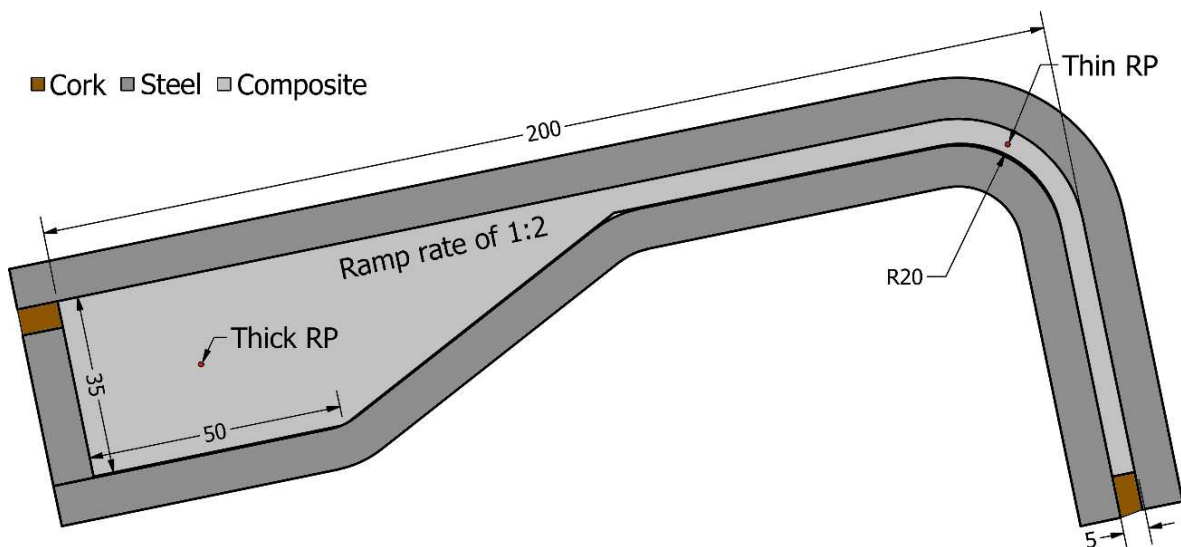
2D cross-sectional view of design, incl. tooling, with key dimensions in millimetres.
